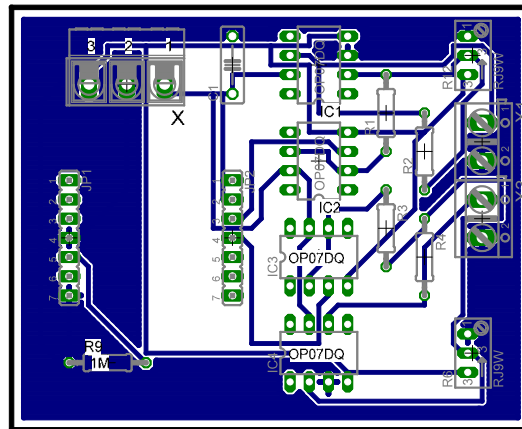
The ADXL 210 Dual-Axis Accelerometer Sensor Circuit Board (Eagle CAD)
